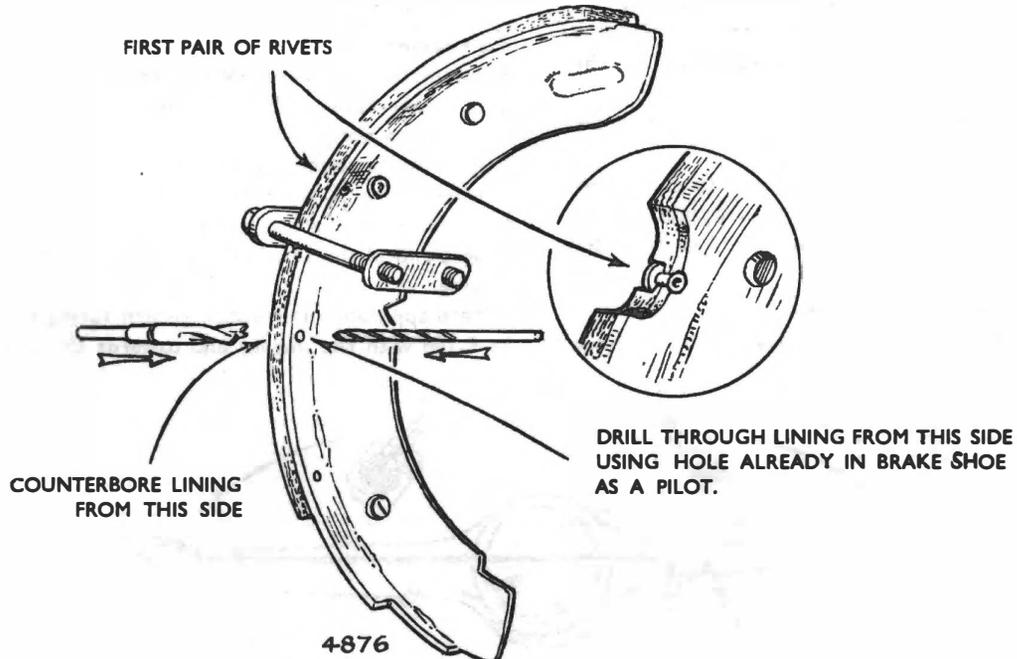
Method of drilling "off the roll" linings when these have to be used
